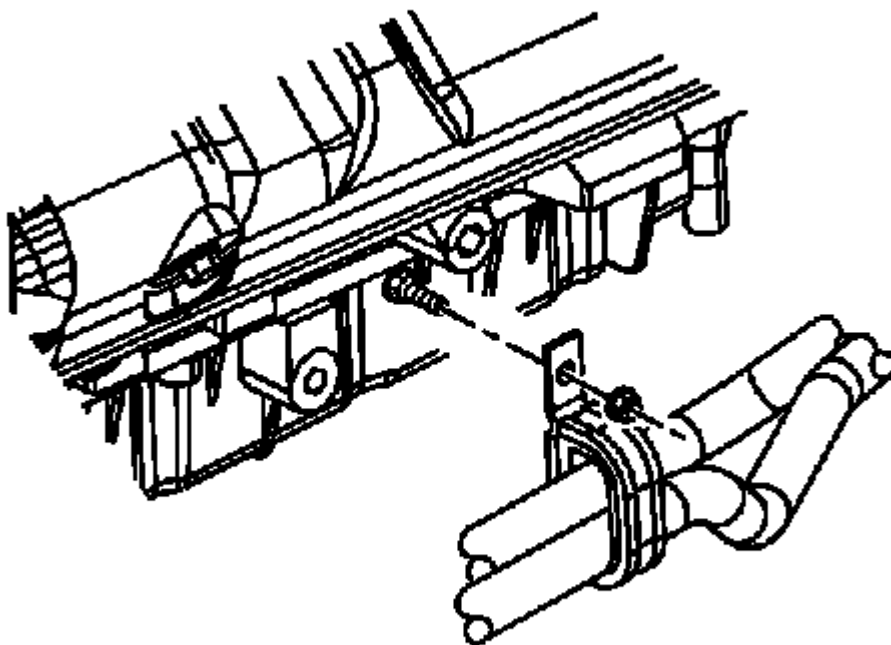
View Of Transmission Oil Cooler Lines, Bracket & Bolt
